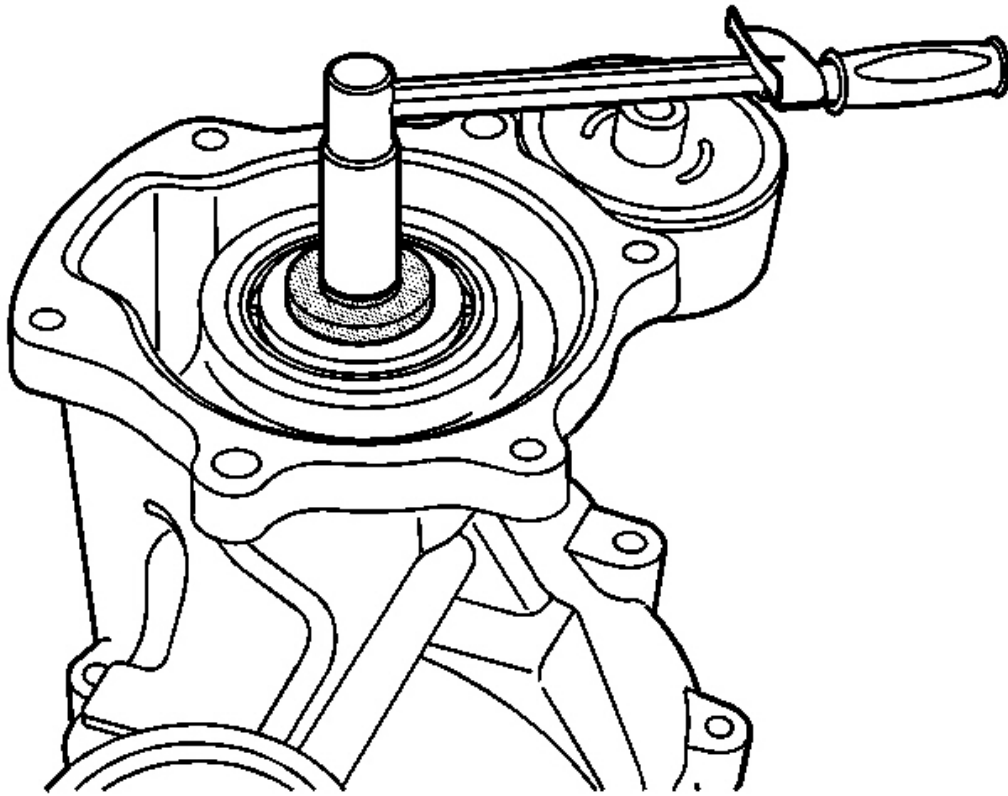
Rotating Stud Assembly While Inspecting Rolling Torque
